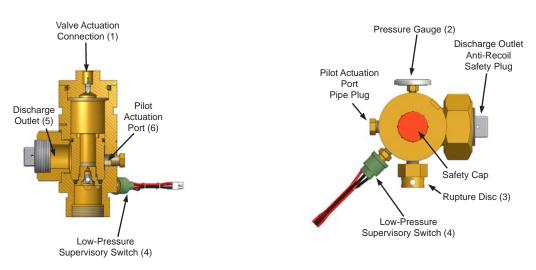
Sv Cylinder Valve Assembly
